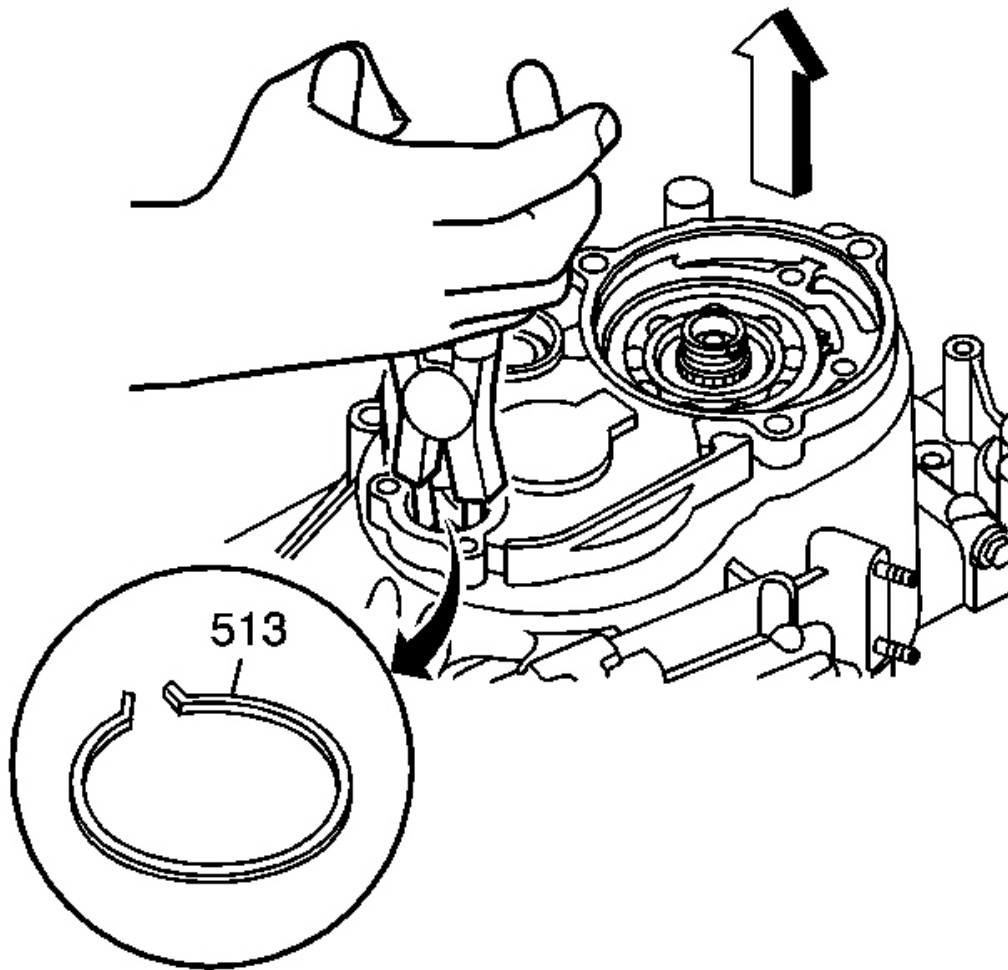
Expanding The Output Shaft Retaining Ring Using A Snap Ring Pliers
